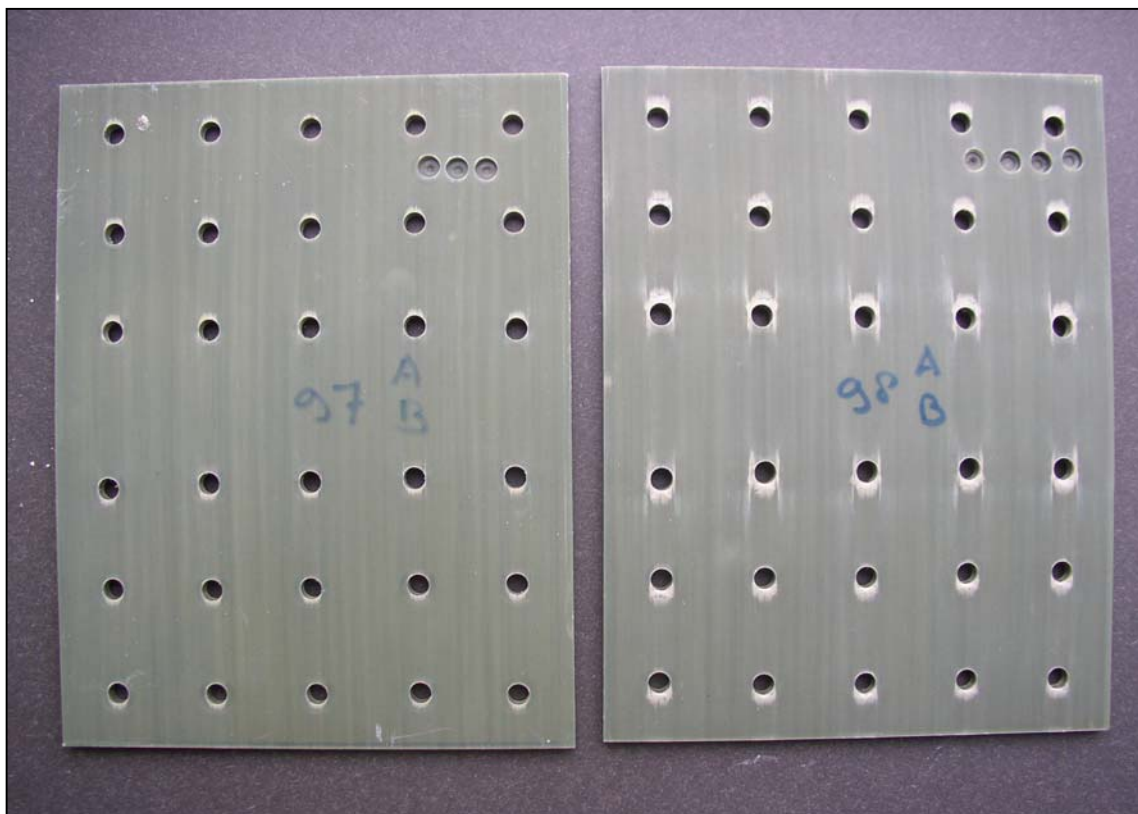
View on the first prepreg layers of specimens 2-B-97 and 2-B-98 butt straps after etching of the mating aluminium layers, specimen 2-B-97 loaded to 120 kN, specimen 2-B-98 loaded to 170kN
